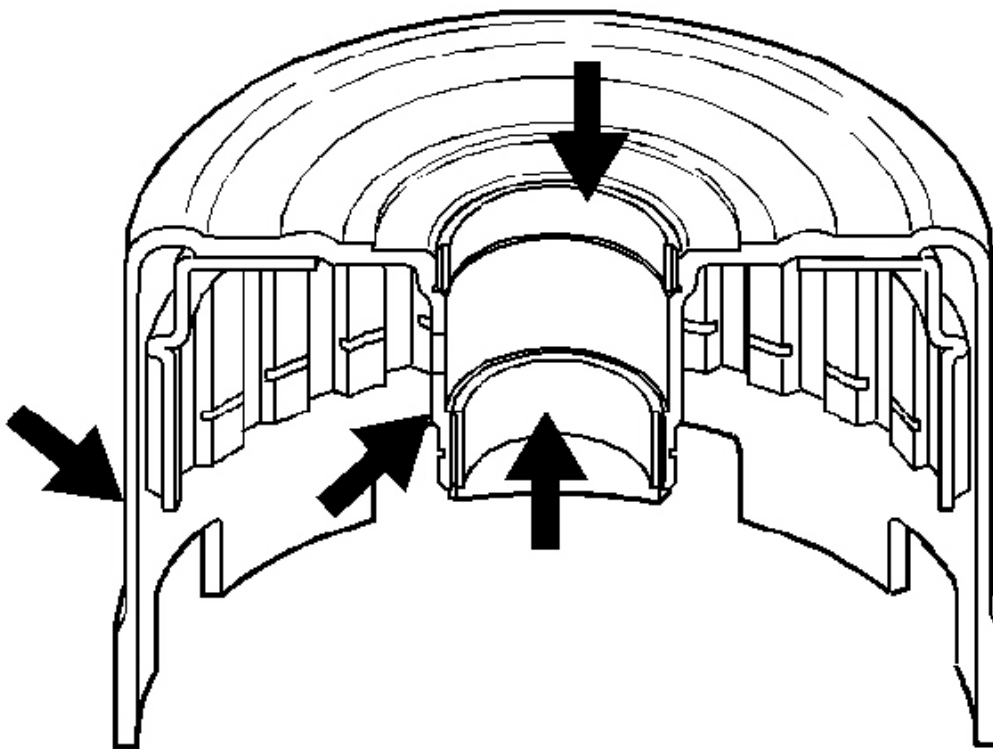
Inspection Areas On Reverse Input Clutch Housing & Drum Assembly
